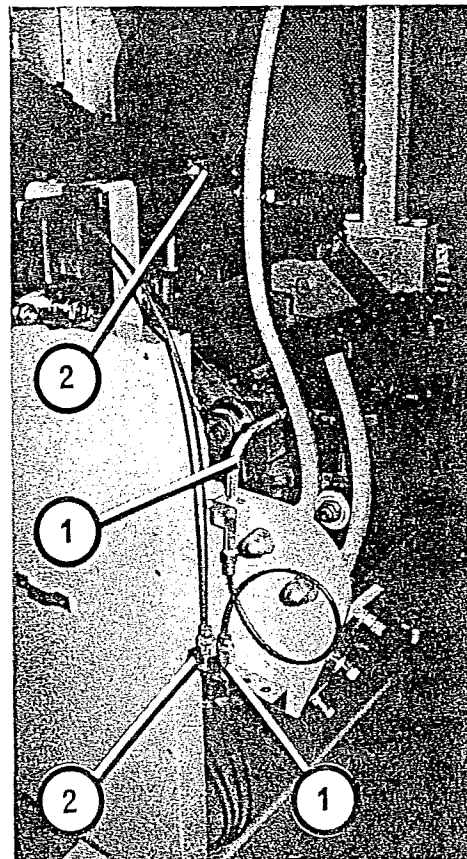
Ball valve for cooling nozzle (1) and scraper (2)
